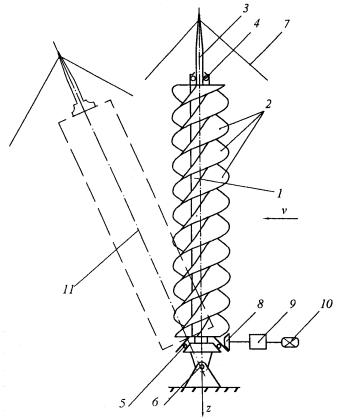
Funnel-like screw-type windmill: 1) hub; 2) funnel-like screw blades; 3) mast; 4, 5) upper and lower bearing supports; 6) hinge; 7) tension members; 8) transmission; 9) step-up gear; 10) electric generator; 11) wind rotor in the inclined position.
